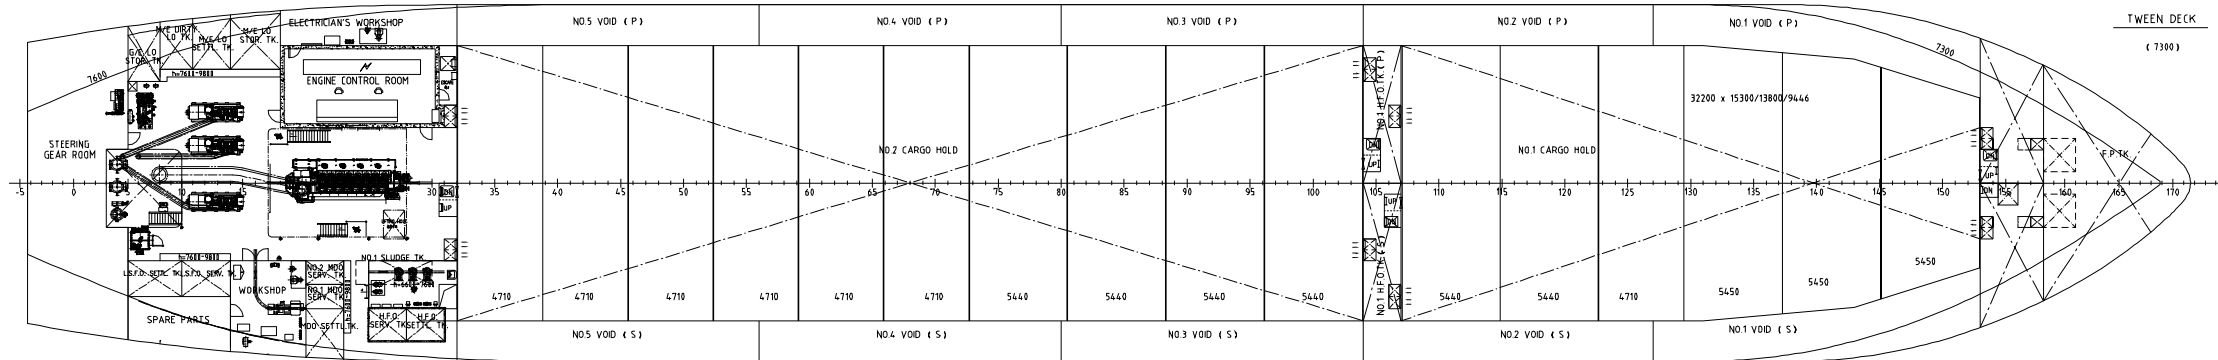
DETAIL DESIGN 详细设计		9000DWT MULTI-PURPOSE VESSEL 9000吨多用途船	SC4529-100-04B
